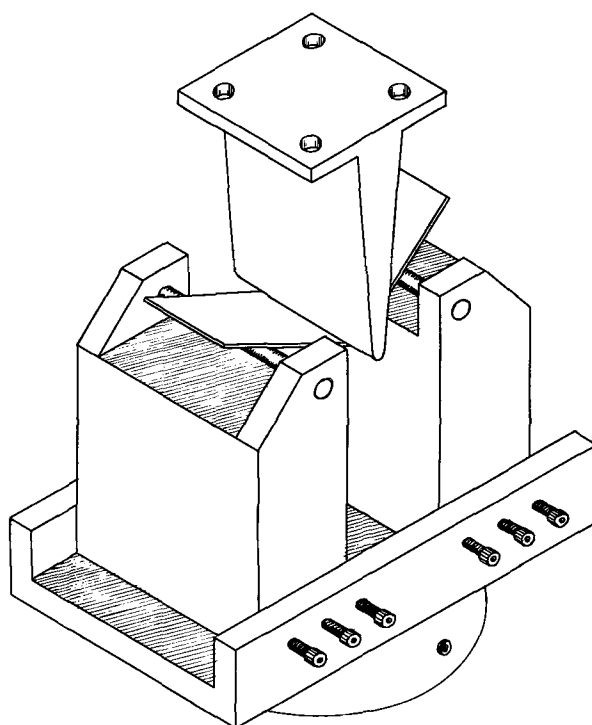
Adjustable bend vise and wedge assembly, showing three-point loading of a bend specimen.
